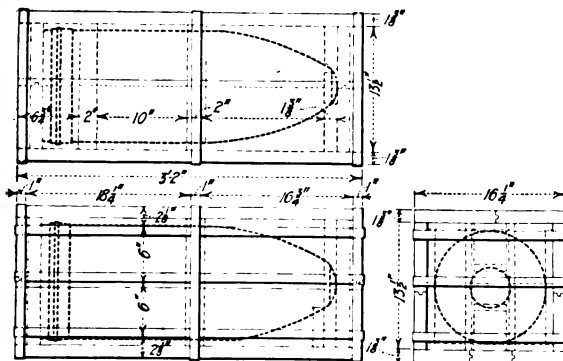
DETAILS OF PACKING CASE SPECIFIED FOR THE 12-IN. SHRAPNEL
